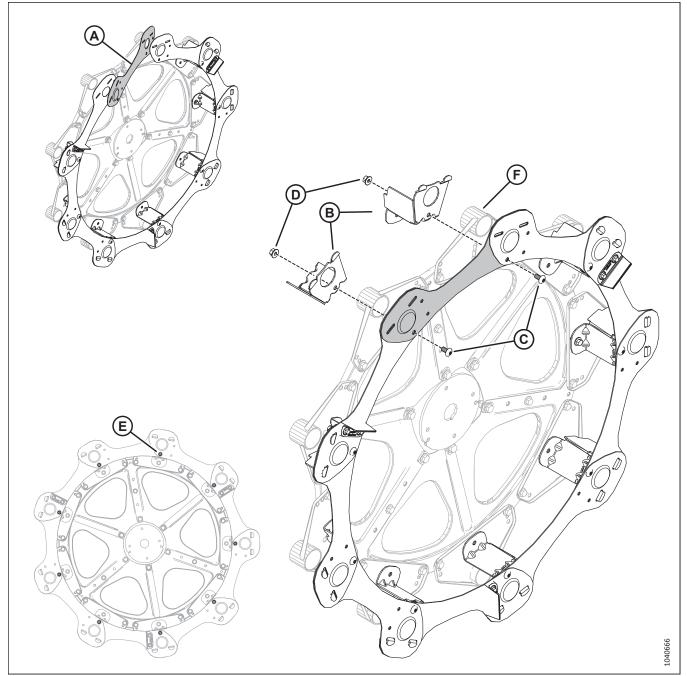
Nine-Bat Reel – Initial Endshield Assembly
